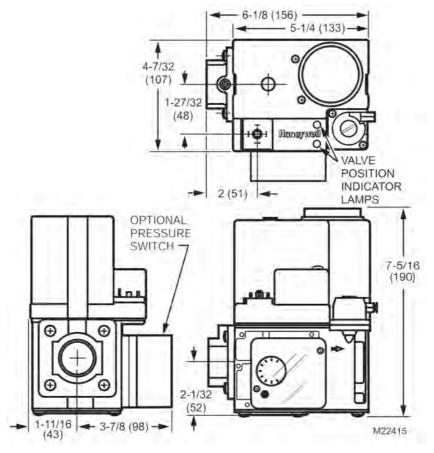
V4730C/V8730C Gas Valves, 1 in. (25 mm) size, dimensions in in. (mm).
